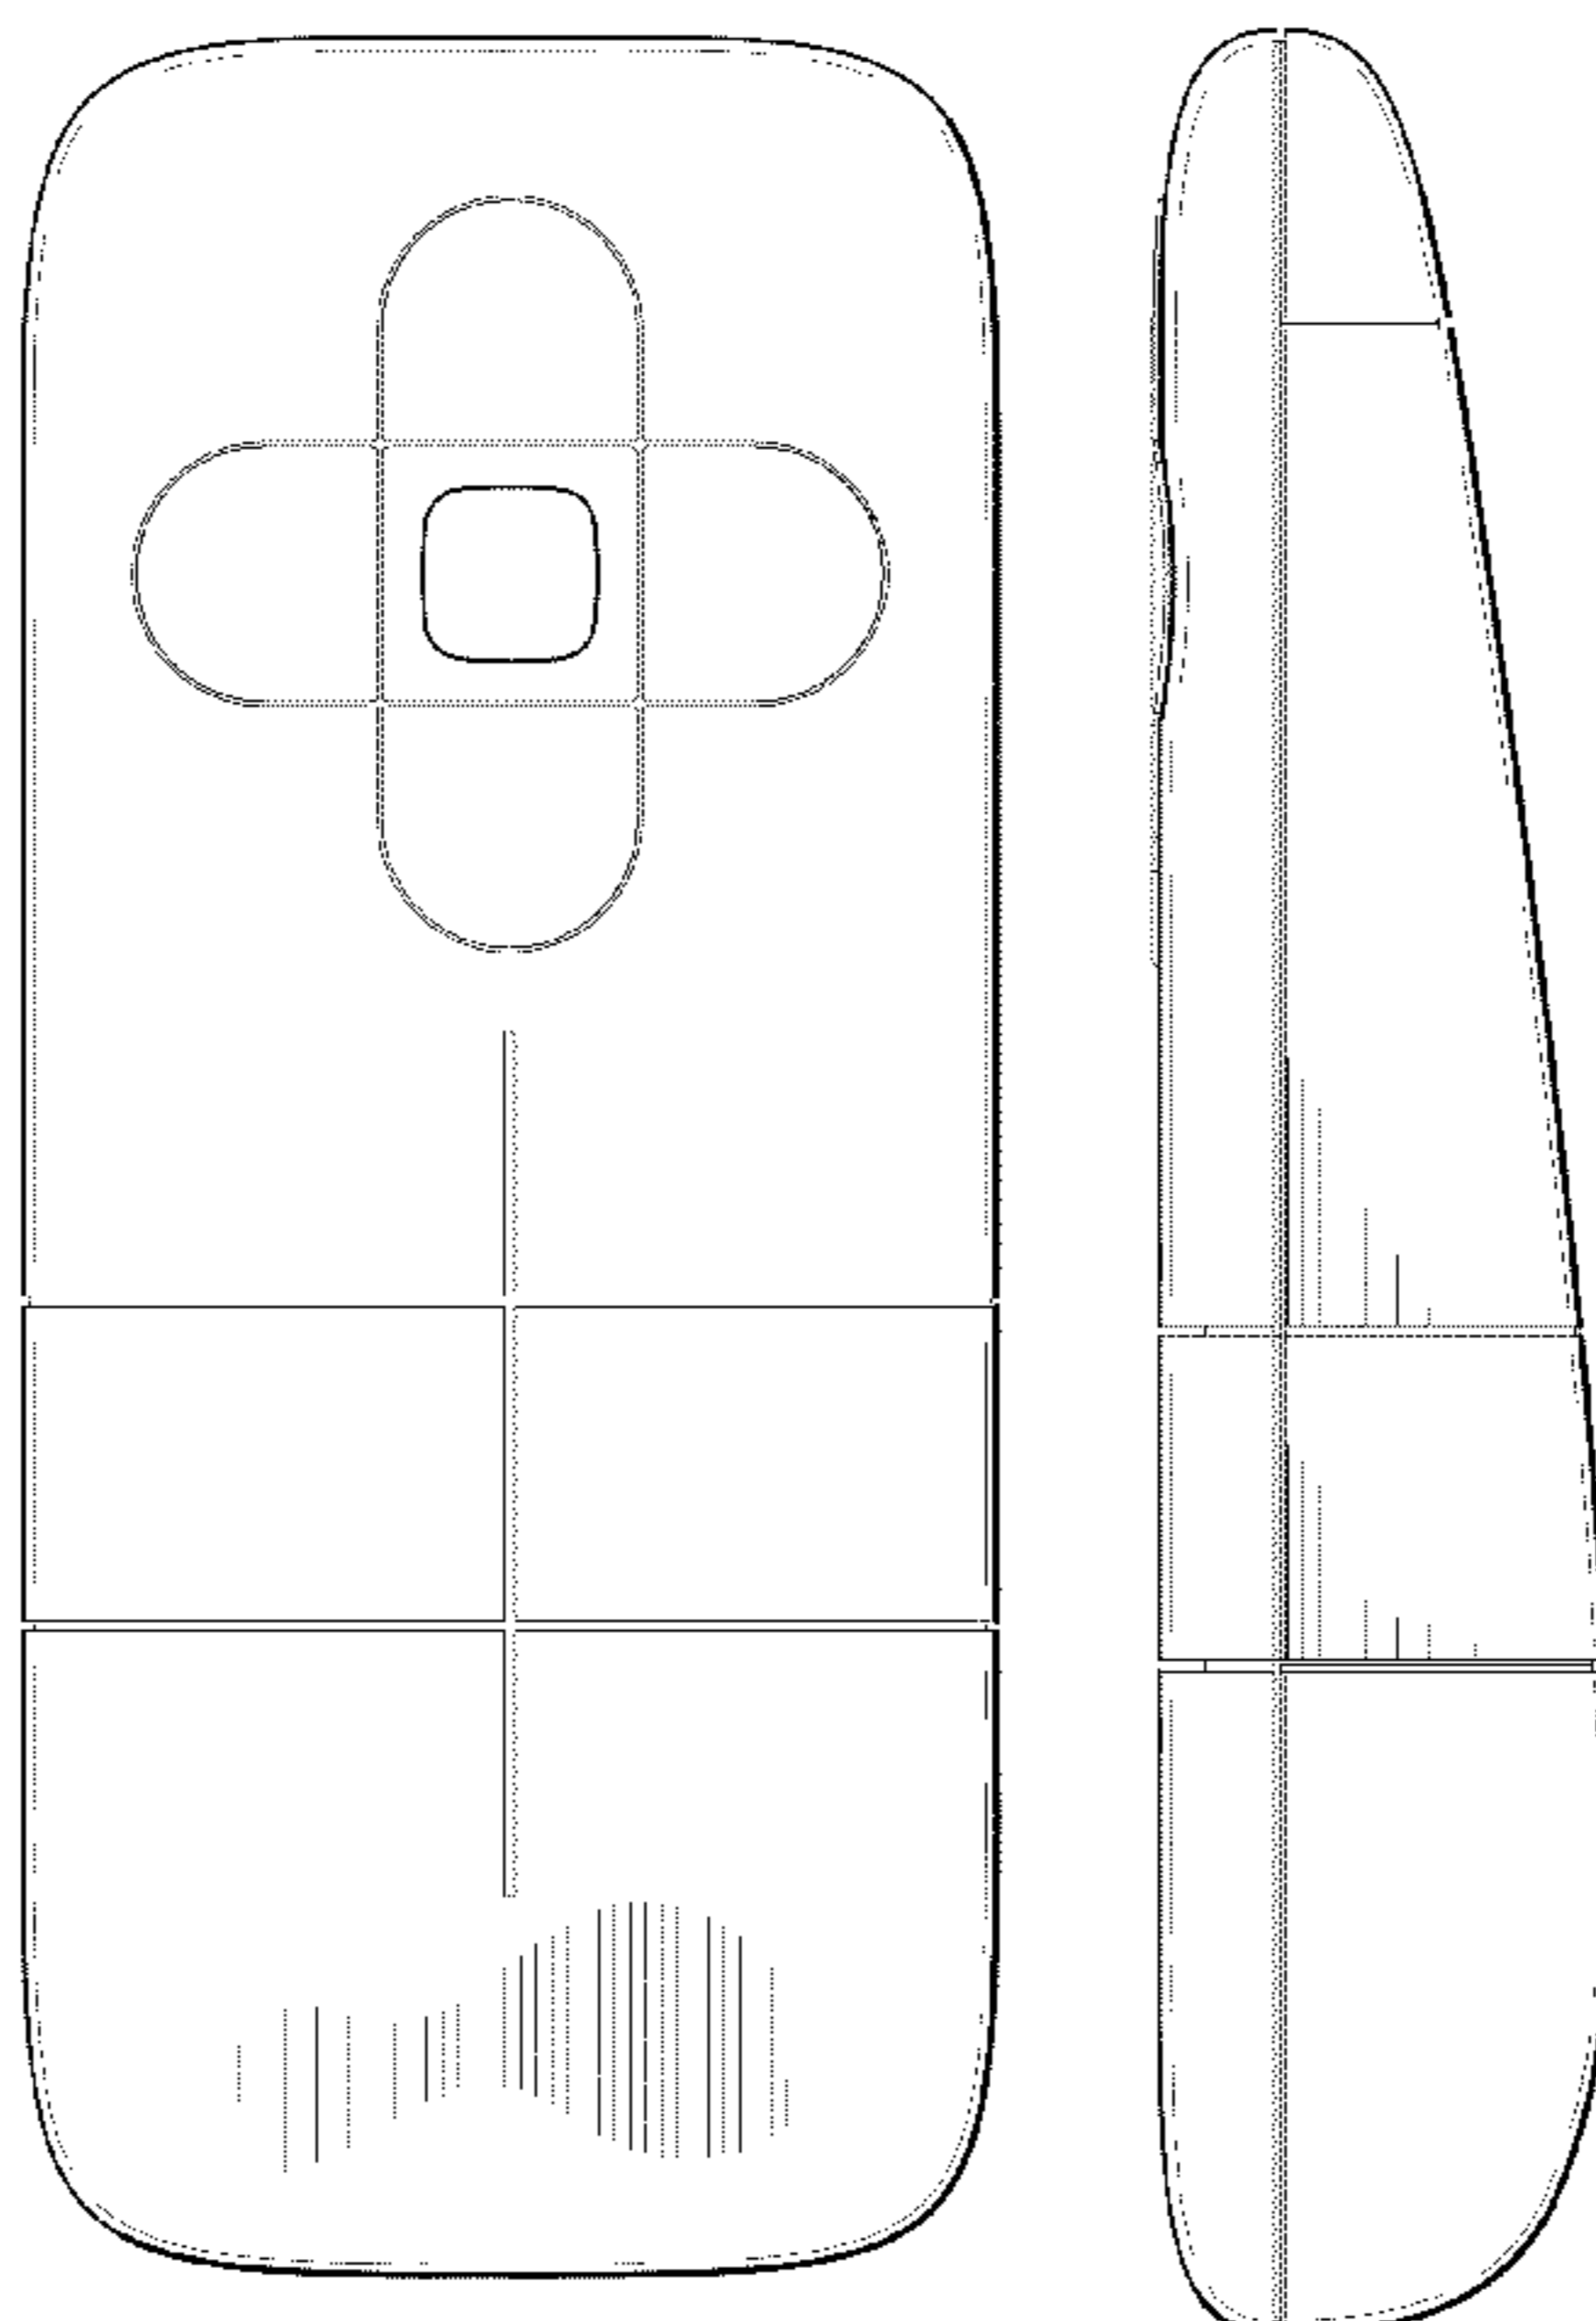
is a rear elevation view of the remote control of FIG. 1;
